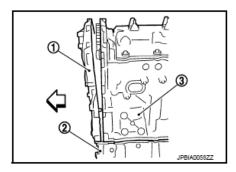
Identifying Front Timing Chain Case, Oil Pan (Upper) And Cylinder Block Courtesy of NISSAN NORTH AMERICA, INC.
